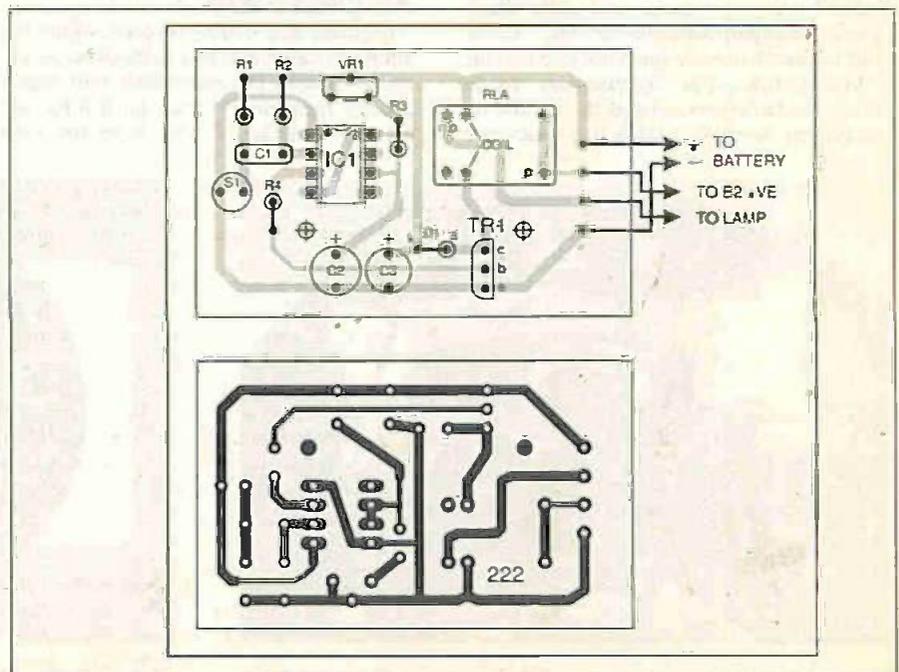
Auto Cupboard Light printed circuit board component layout and full size underside copper foil master pattern.
